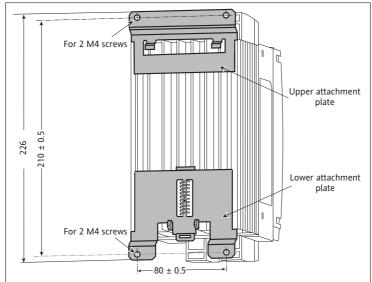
Bulkhead mounting using an attachment plate (80A and 100A, rear view).
